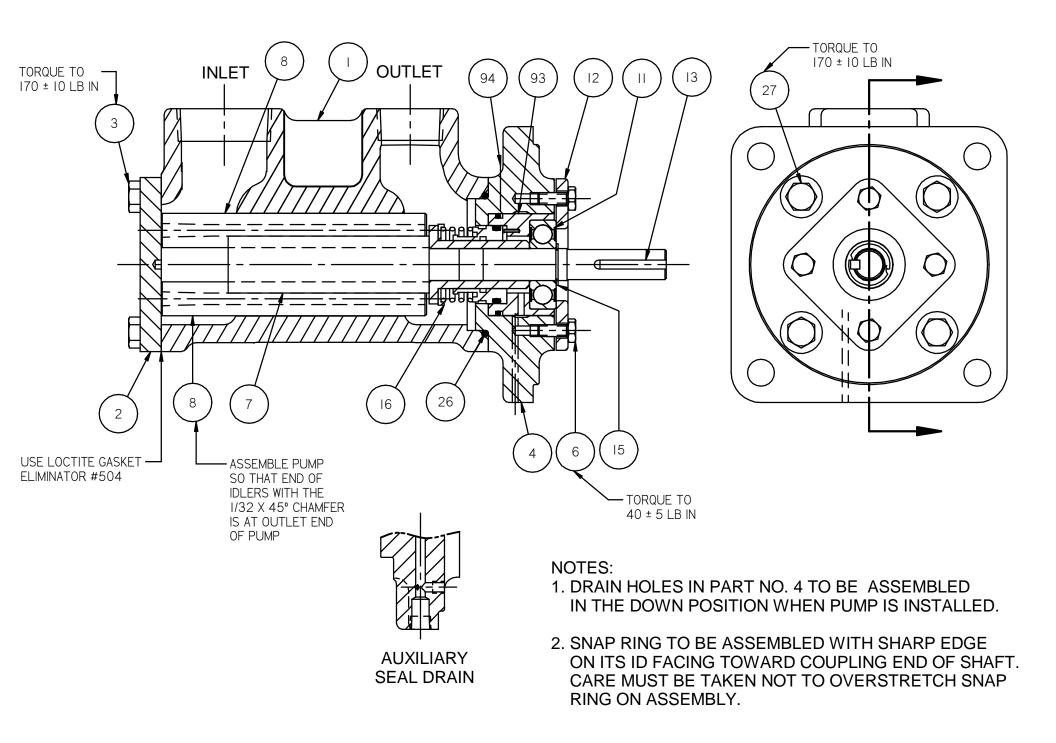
IRON CASE C-FACE MOUNT ASSEMBLY
